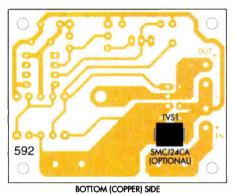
the optional transient voltage suppressor (TVS1) is soldered directly to the copper side of the PC board. It's non-polarised and can be mounted either way around.
